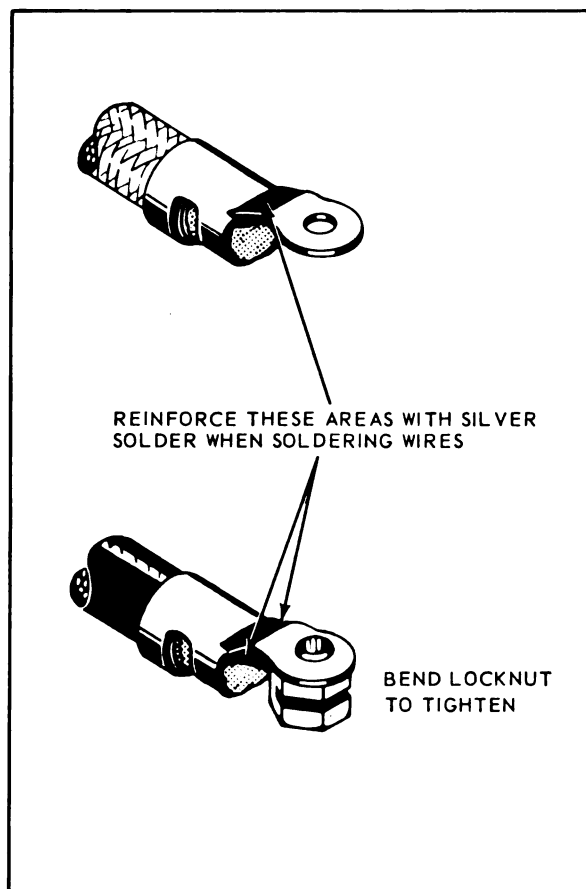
Reinforcing Solder on AN 5539 Terminals
